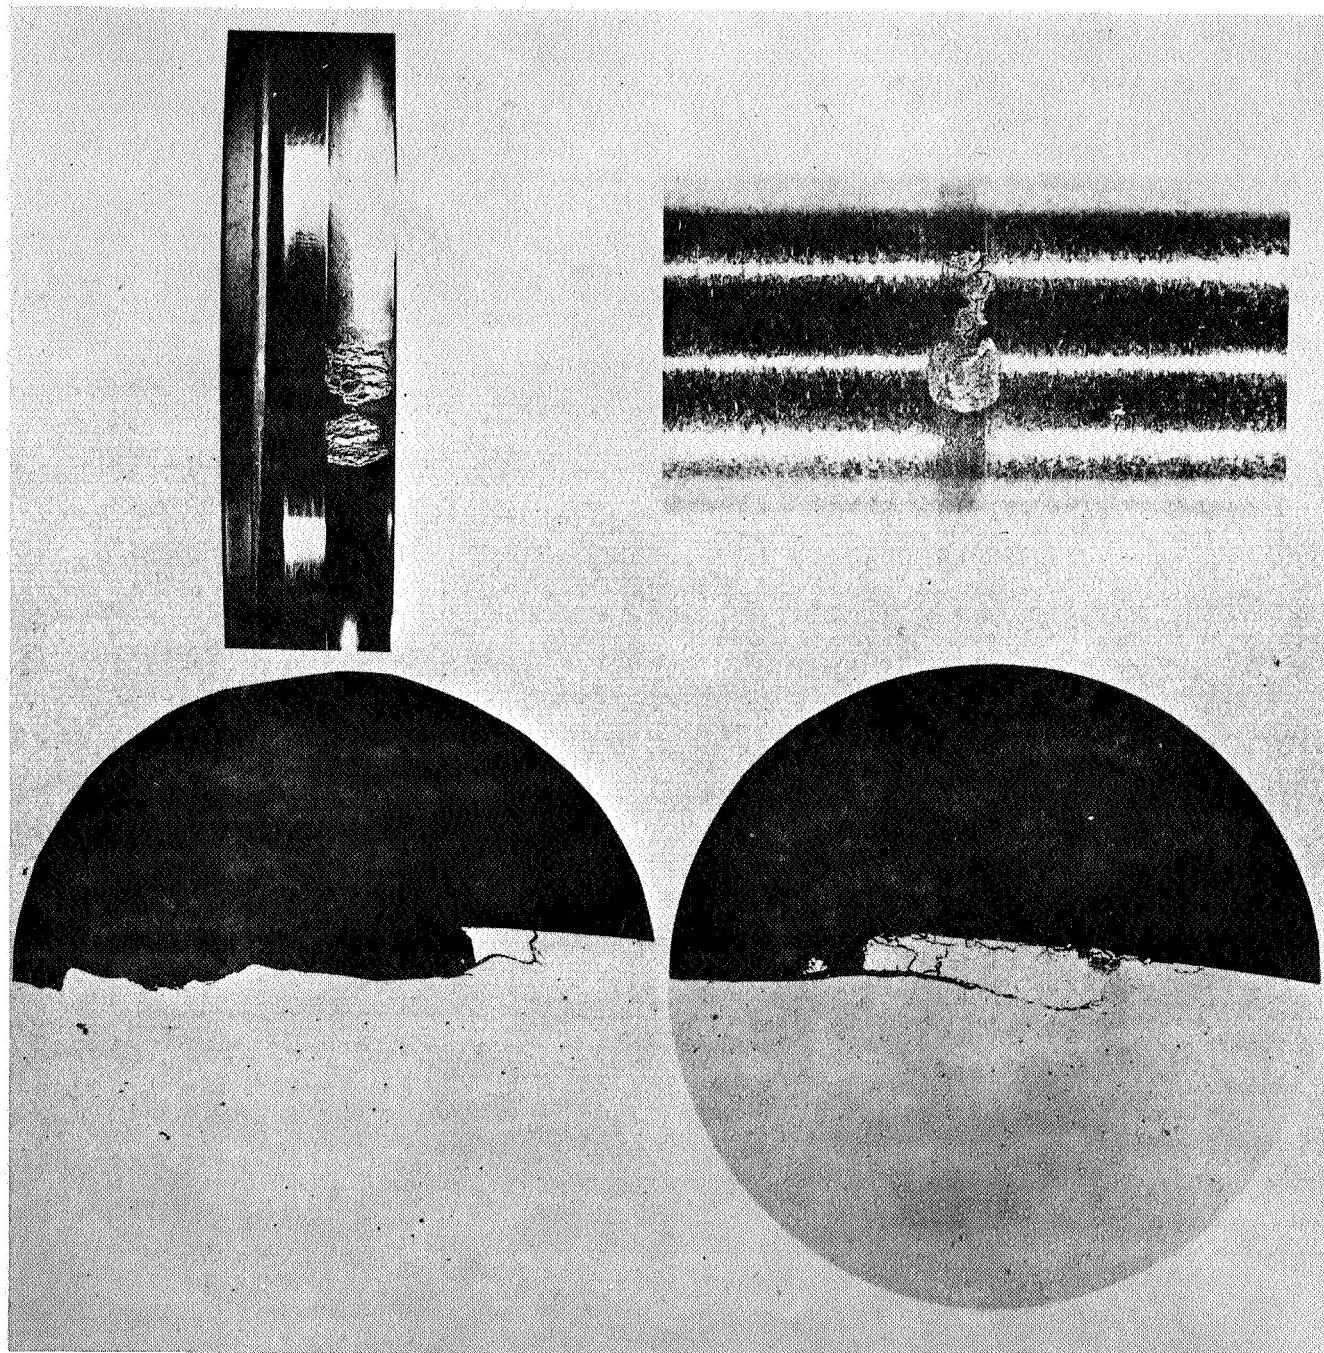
FAILURE SIMILARITY BETWEEN ACTUAL BEARING AND RC RIG SPECIMEN
